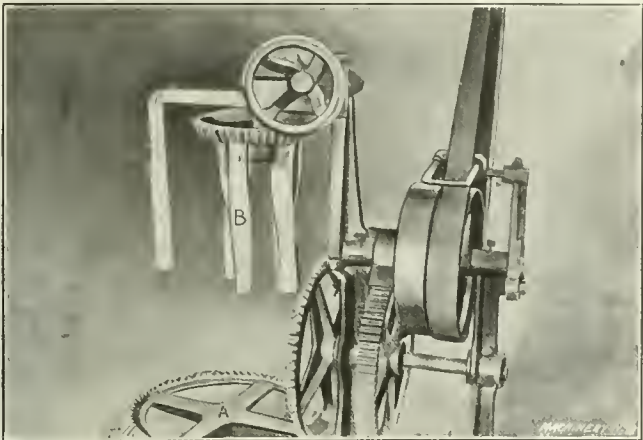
Machine used to thoroughly mix the Filler made in the Shop
